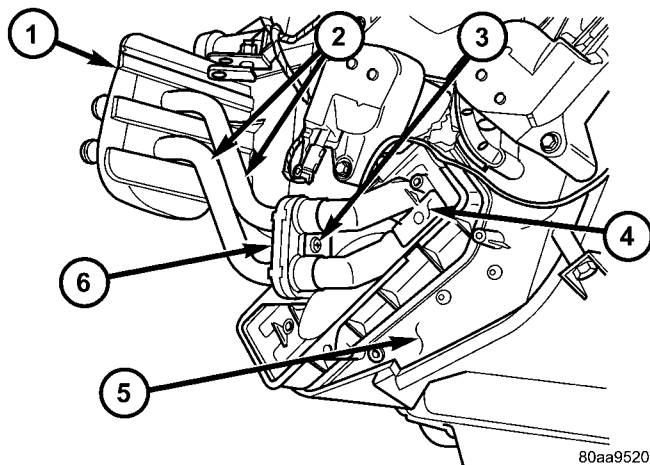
Heater Core Tubes - LHD Shown, RHD Typical
